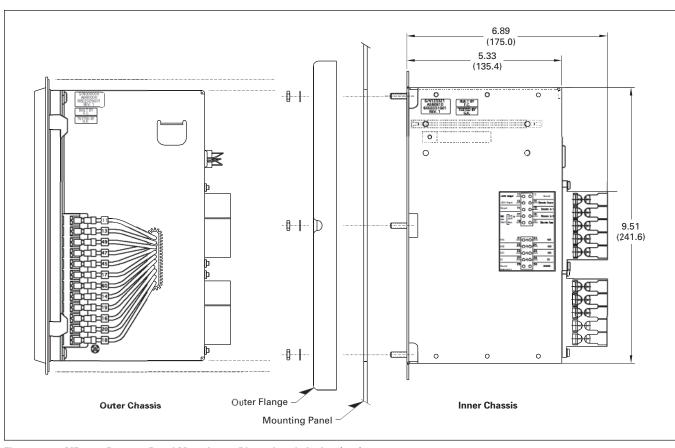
MP-3000 Drawout Panel Mounting — Dimensions in Inches (mm)
